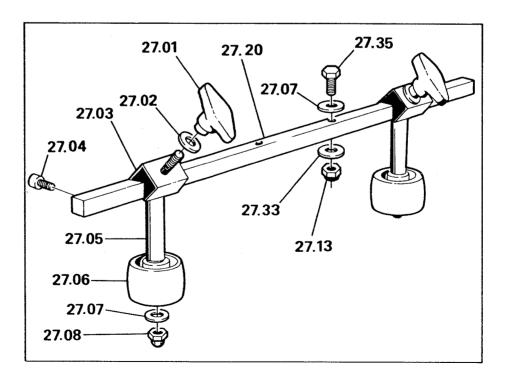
TOP FLAP COMPRESSION ROLLER ATTACHMENT - PARTS ILLUSTRATION (Instructions continued on back page)
